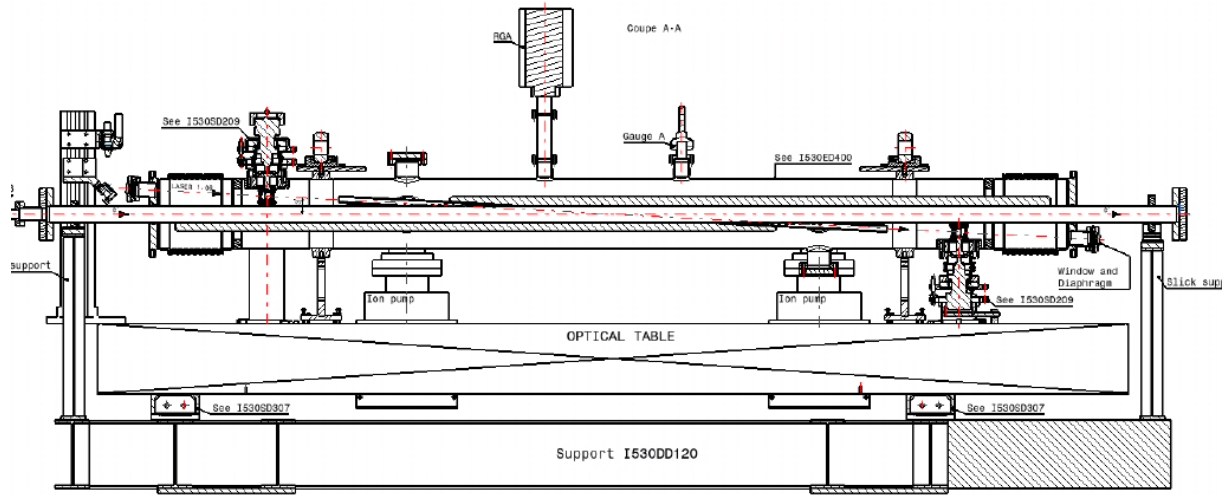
Technical drawing (longitudinal view) of the cavity. See text for comments. From [10].
